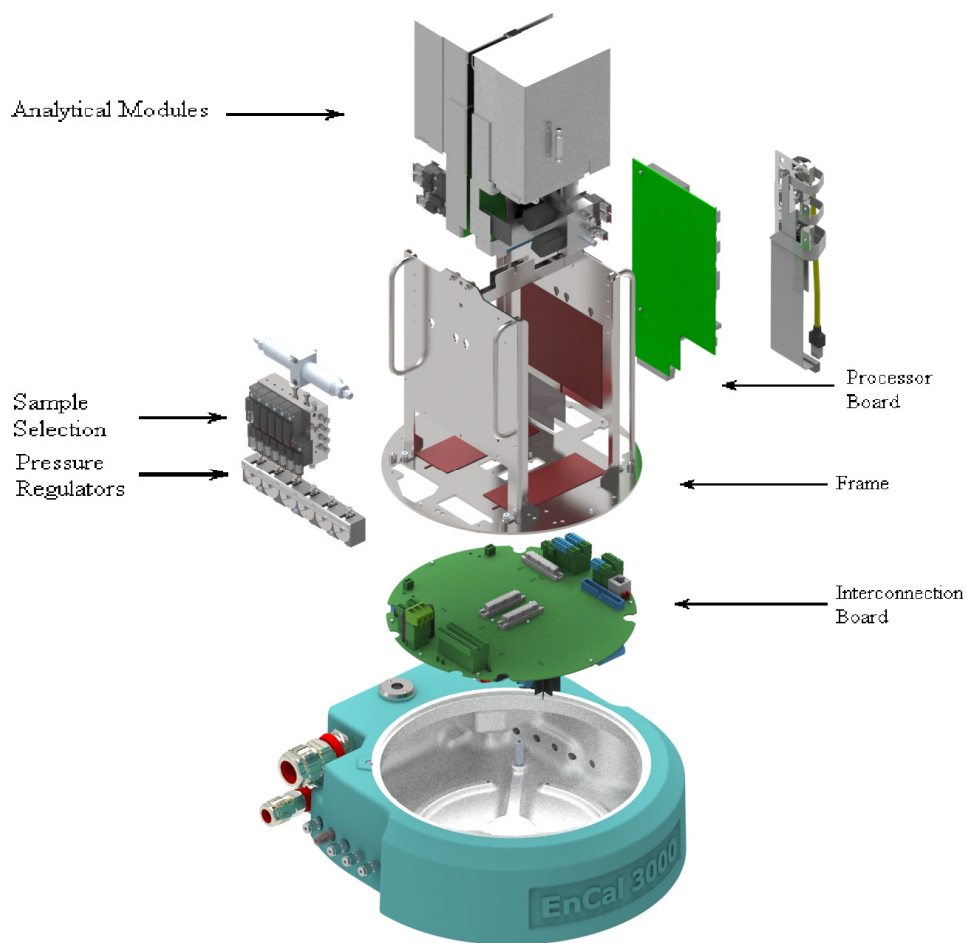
Exploded View on the Internal Parts of the EnCal 3000
